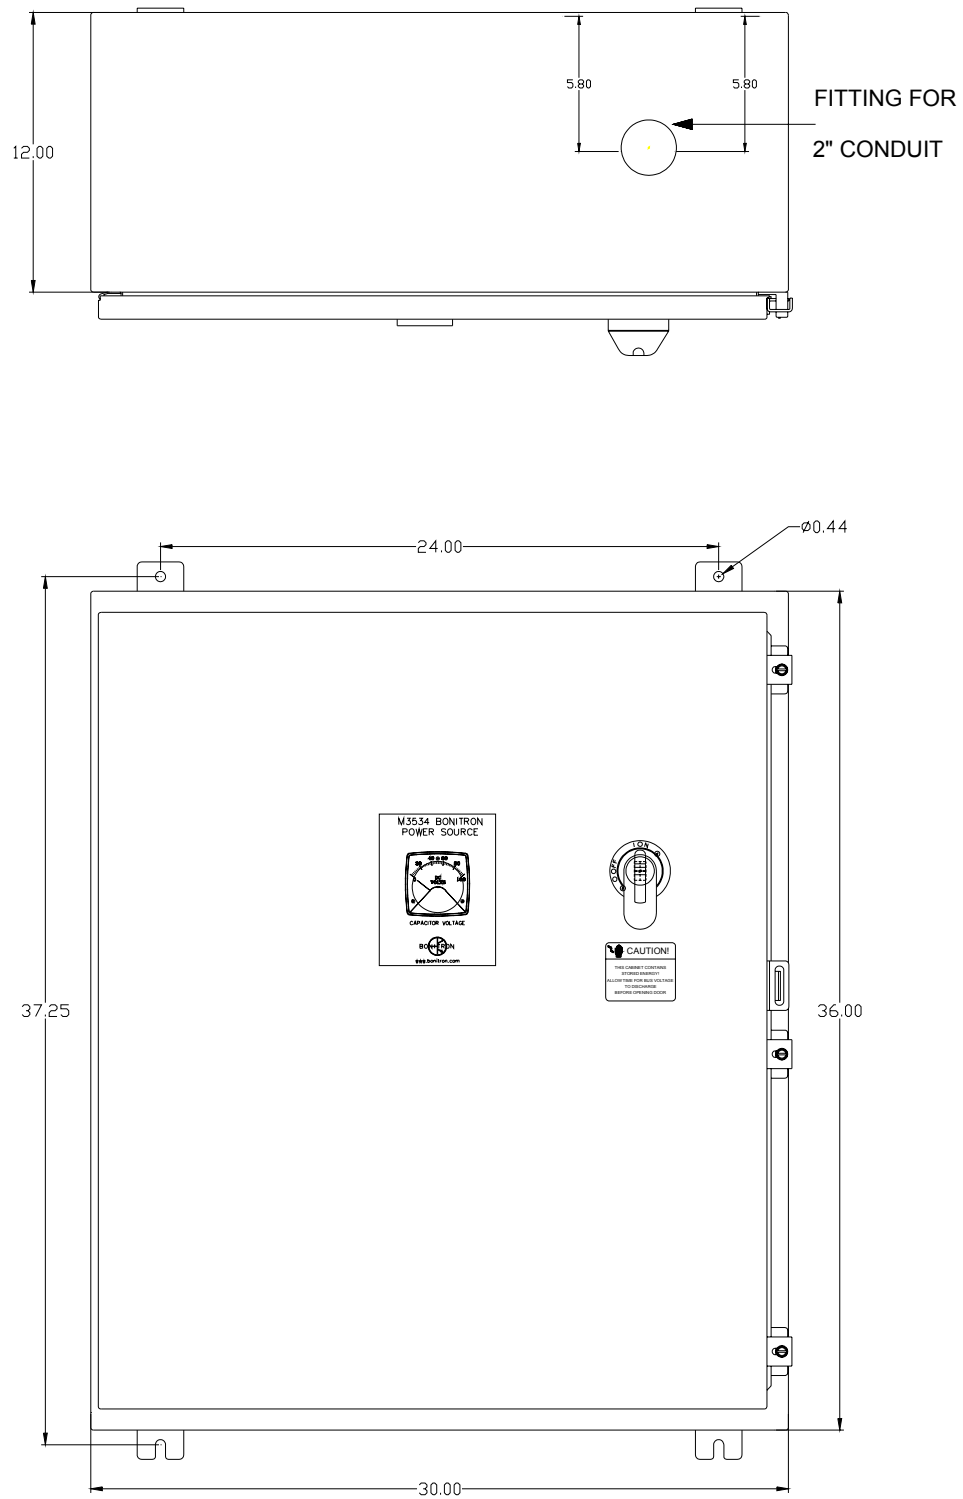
M3534CR 'E69' 8.0kJ Enclosure Dimensional Outline
